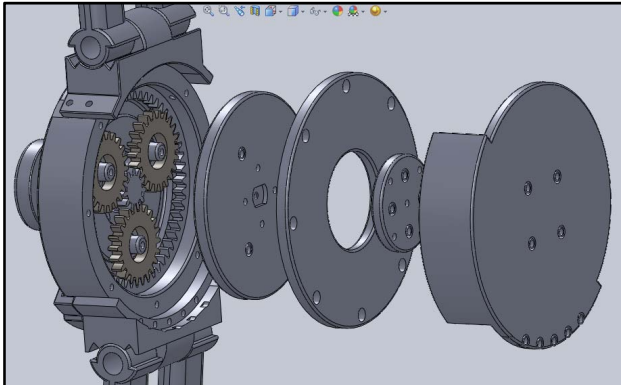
Explode View of Knee Actuator Single Layer Planetary Gearbox
